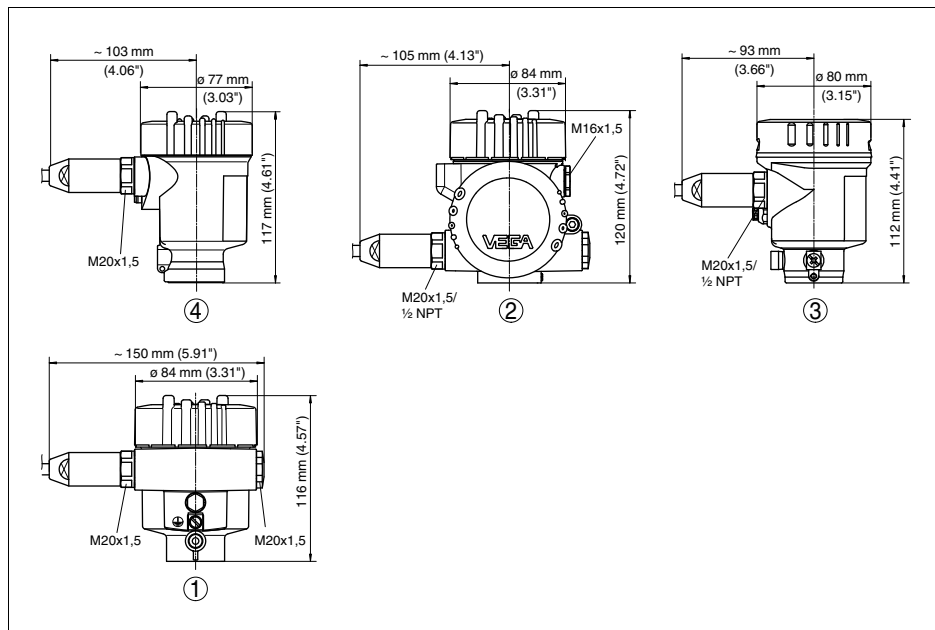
Housing versions in protection IP 66/IP 68, 1 bar (with integrated indicating and adjustment module the housing is 9 mm/0.35 in higher)
